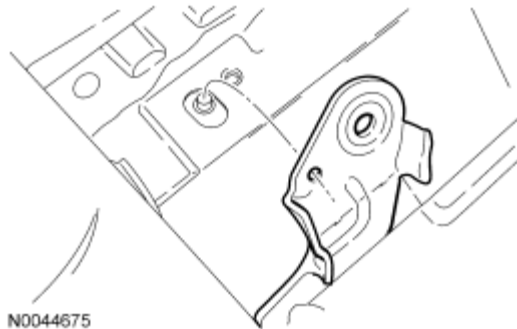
Identifying Rear Seat Backrest Pivot Assembly Position
